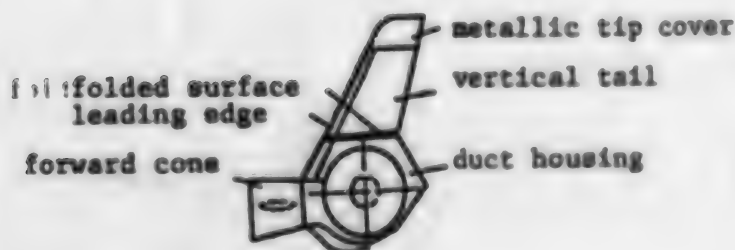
Shaping Mold for Sheathing Duct Cover Skin
